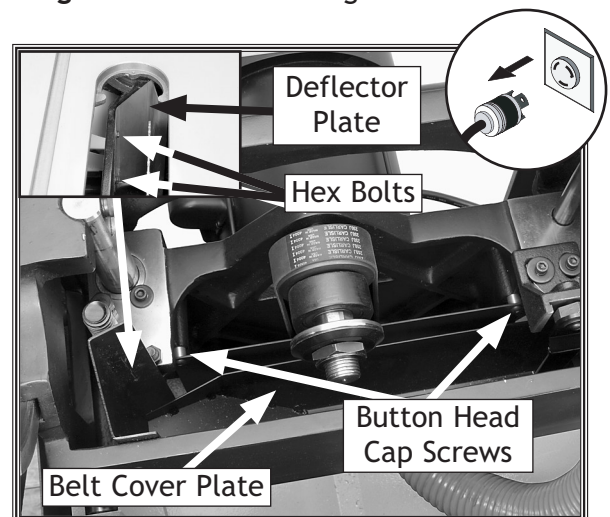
Belt cover plate and top button head cap screws (table removed for clarity).
